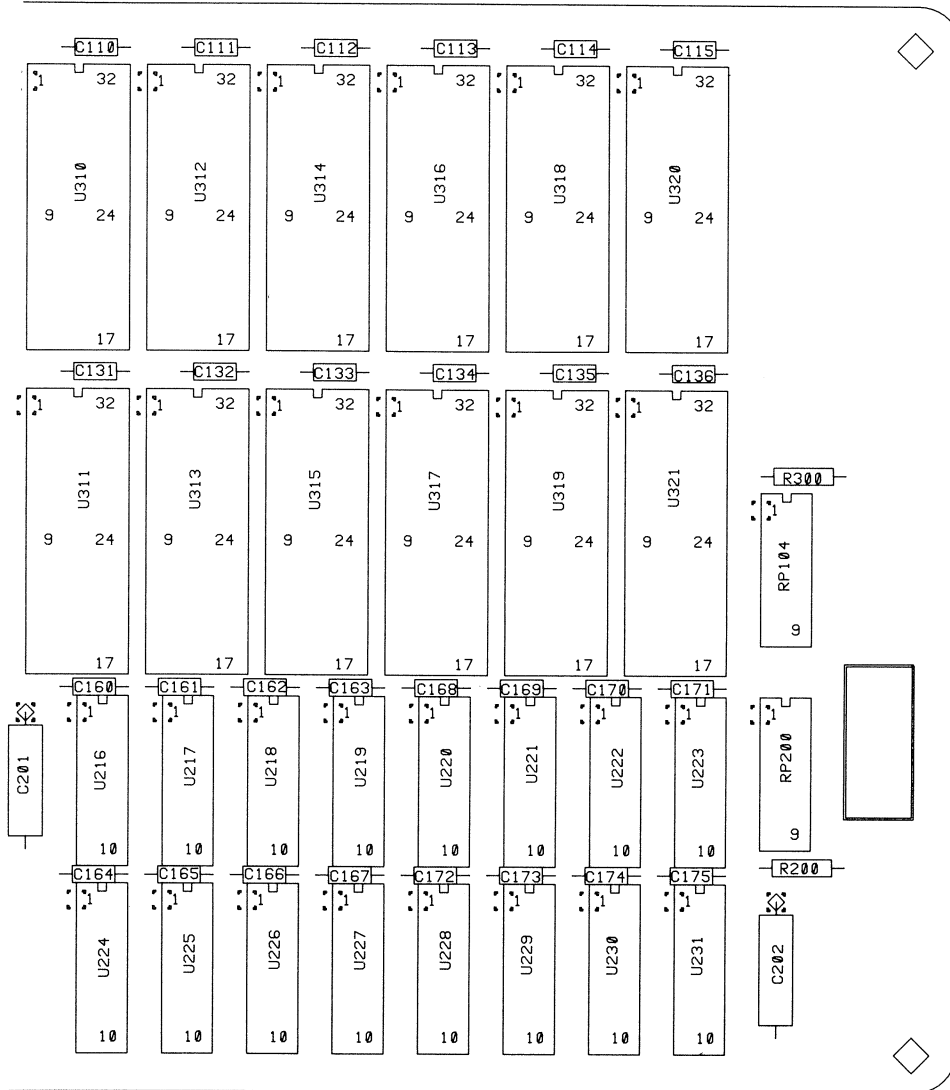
Figure M. P/O Memory Assembly and Expanded Memory Assembly Component Locator
